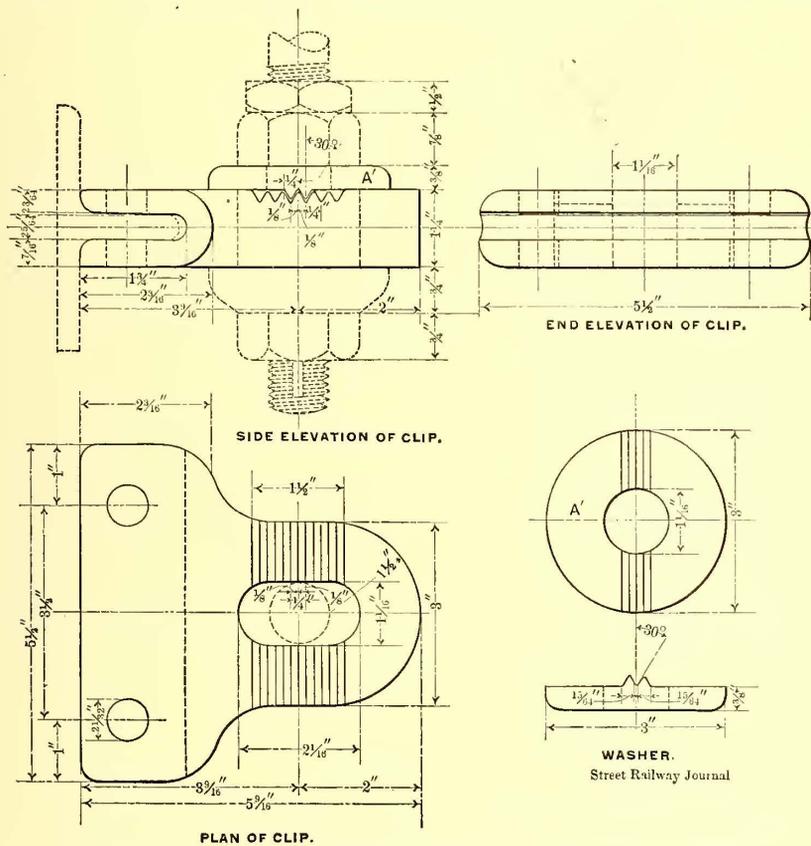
NEW CLIP AND EAR FOR UNDERGROUND CONDUIT.
